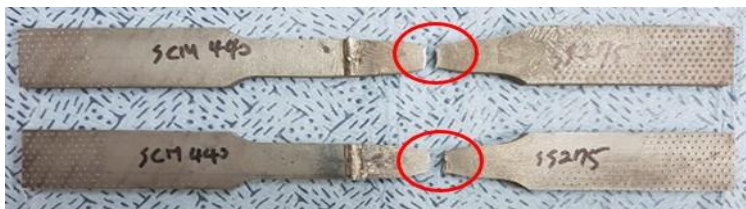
Fractured specimens after tensile test by solid wire for Heat resistant steel
